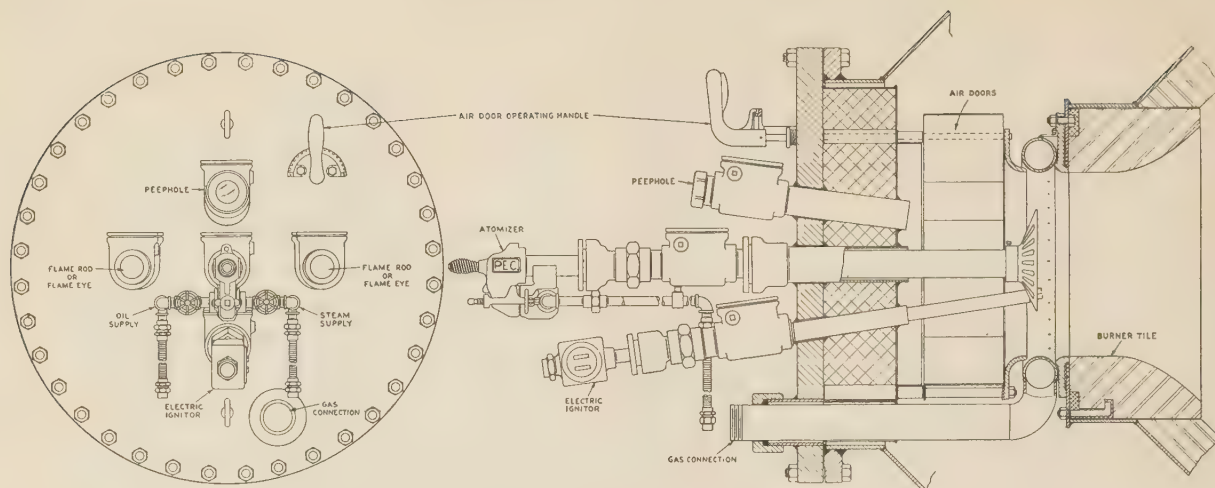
COMBINED GAS AND OIL BURNER FOR HIGH-PRESSURE FURNACE FIRING
